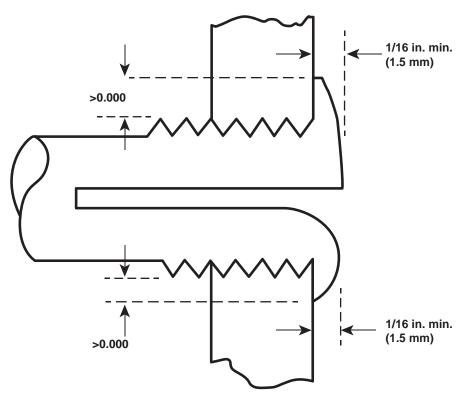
b RIVETED STAYBOLT HEAD DIMENSIONS
